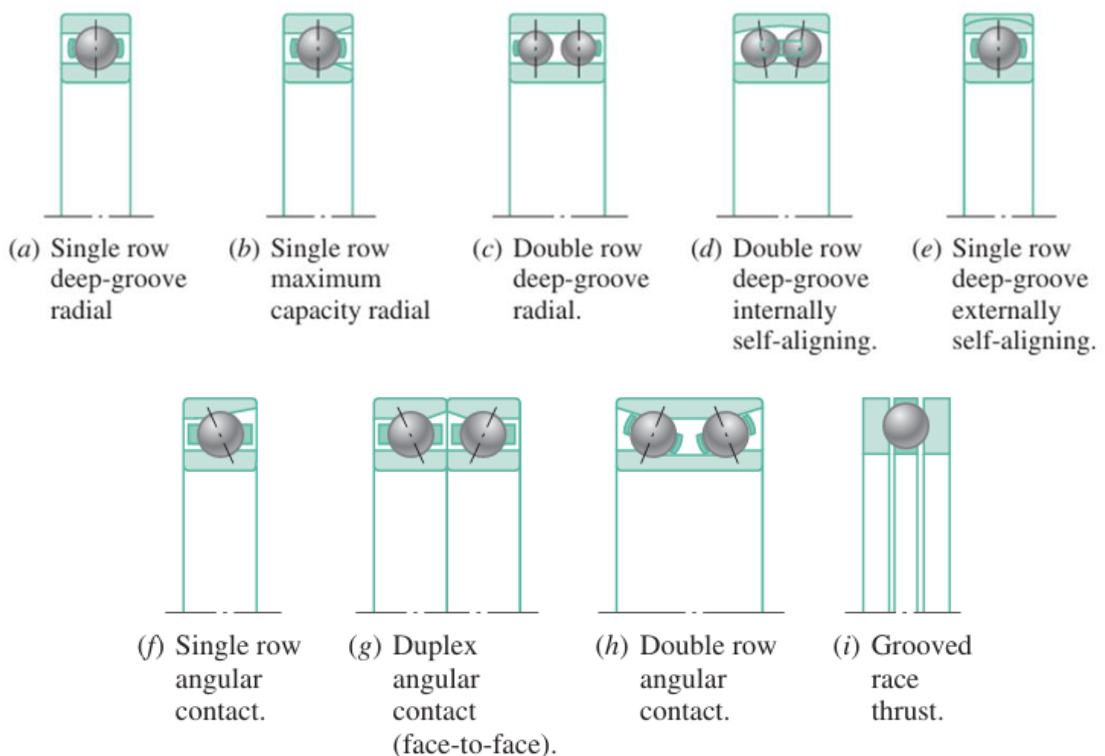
3: Different types of ball bearings commonly used.
